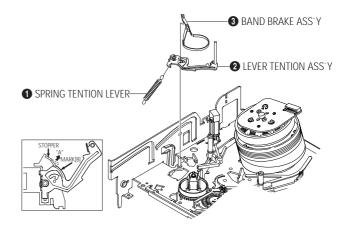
Lever Tension Ass'y, Band Brake Ass'y Removal
